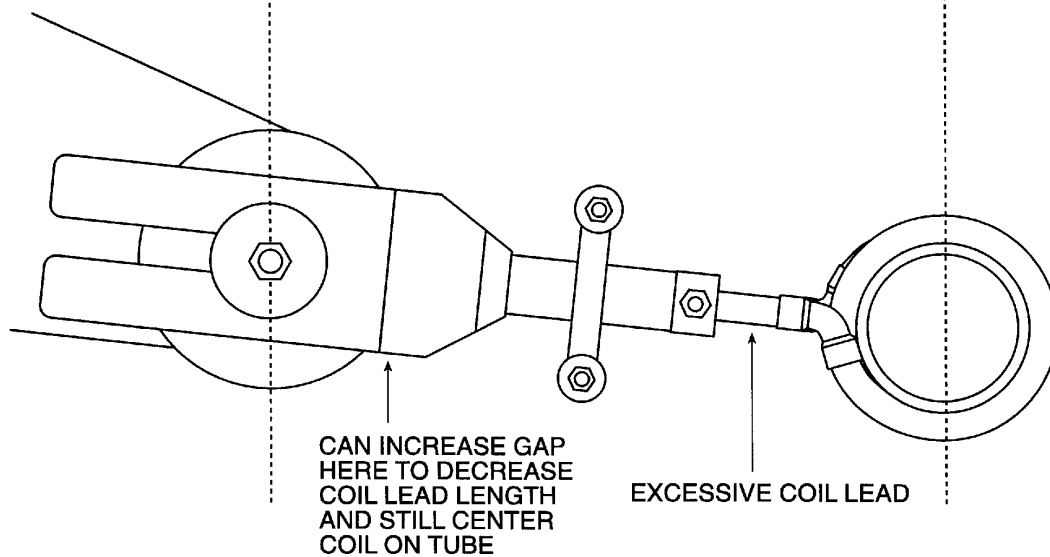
How NOT to Mount the Coil Holder on the Welder's Nose Piece
